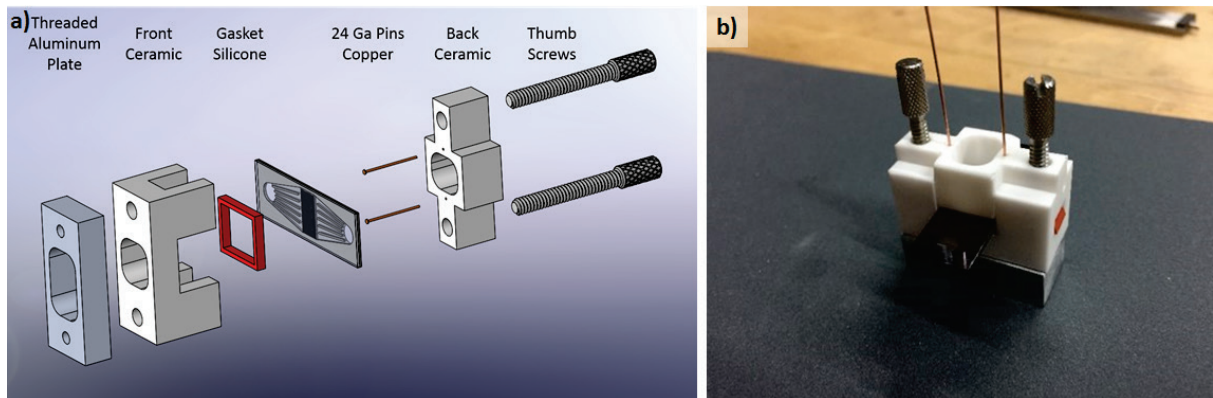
Electrical harness for test section. (a) Exploded model view and (b) assembled view.
